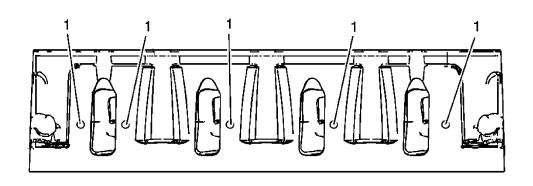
Cylinder Head - Top/End Views Courtesy of GENERAL MOTORS CORP.
